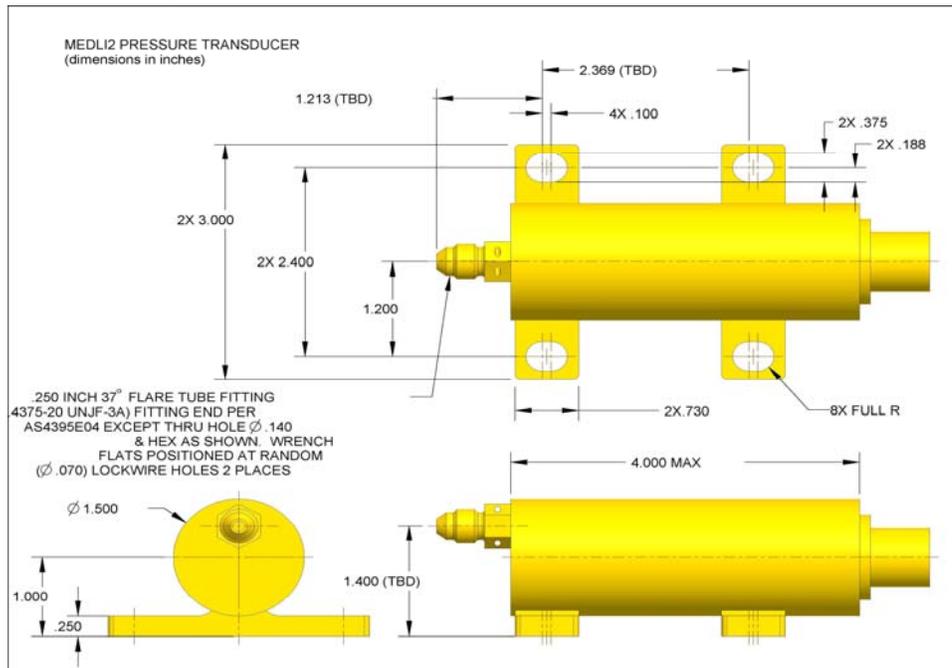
Pressure Sensor 4-Point Mechanical Mounting
